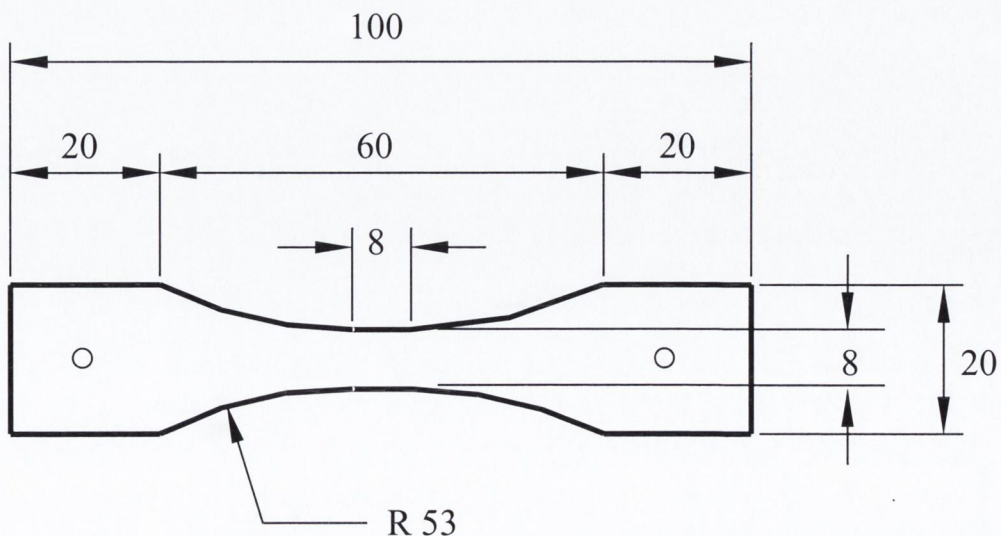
Dimensioned drawing of moulded specimen. All dimensions are in millimetres.
